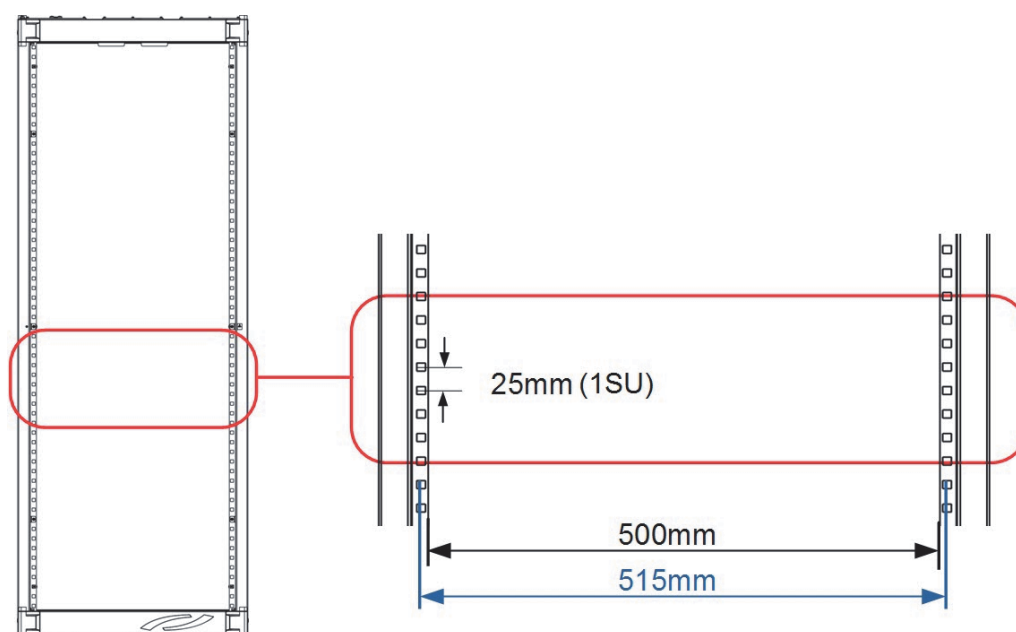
Detailed Dimensions of the 21-inch Cabinet
